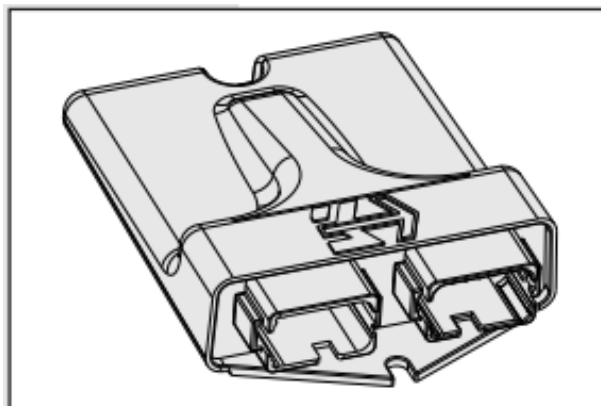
ECDR – 0506A Electronic Configurable Valve Driver
